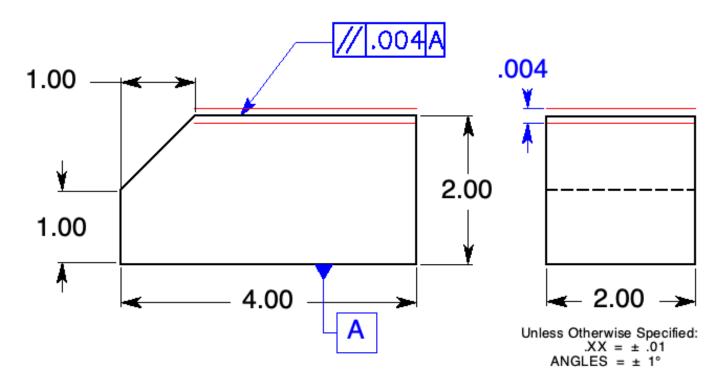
Parallelism of a plane surface: Prob. 5.
